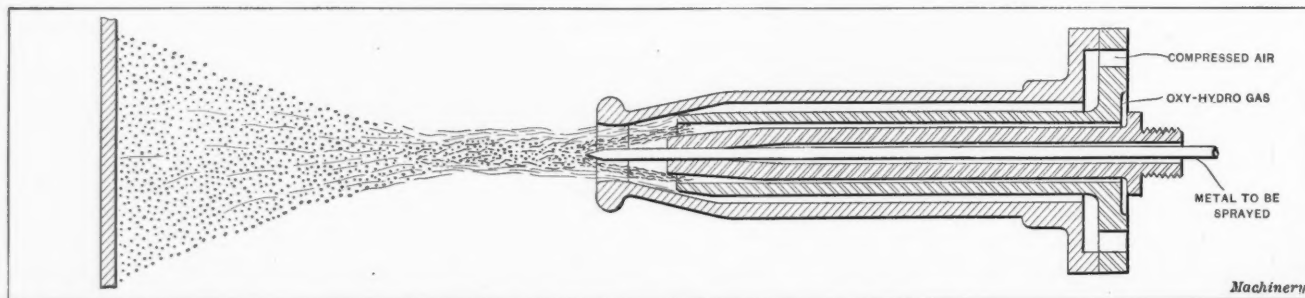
Section of Nozzle Part of Device used for Metal Spraying
